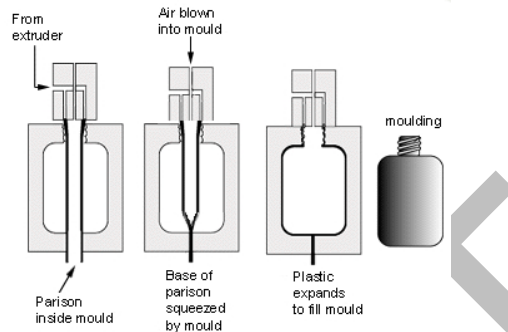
Blow moulding (from <http://tinyurl.com/blowmoulding>)
